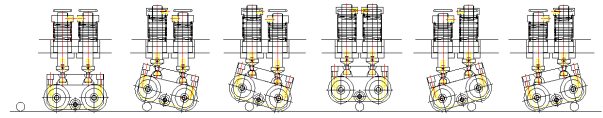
Magnet module's moving layout on the hull-plate with welding bead
